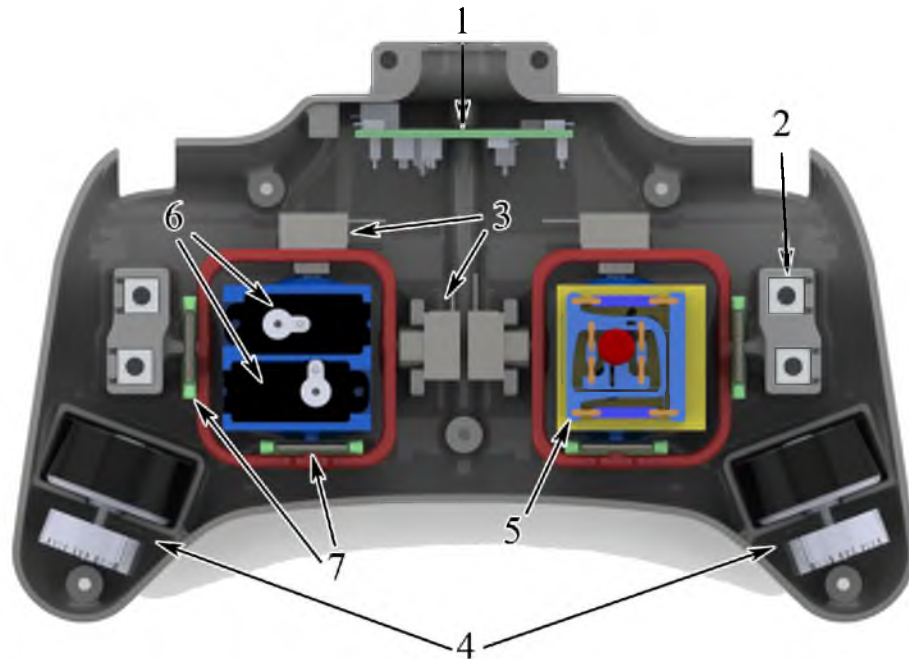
Front-tactor controller with front removed. (1) PCB (2) Tactile switch (3) Joystick potentiometers (4) Vibrotactor motors (5) Flexure stage (6) X- and Y-servos (7) Spring return mechanisms
